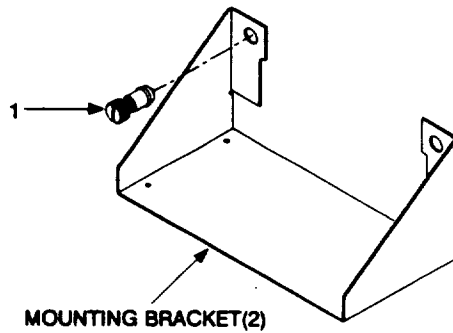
Disassembly of Test Adapter Mounting Bracket
